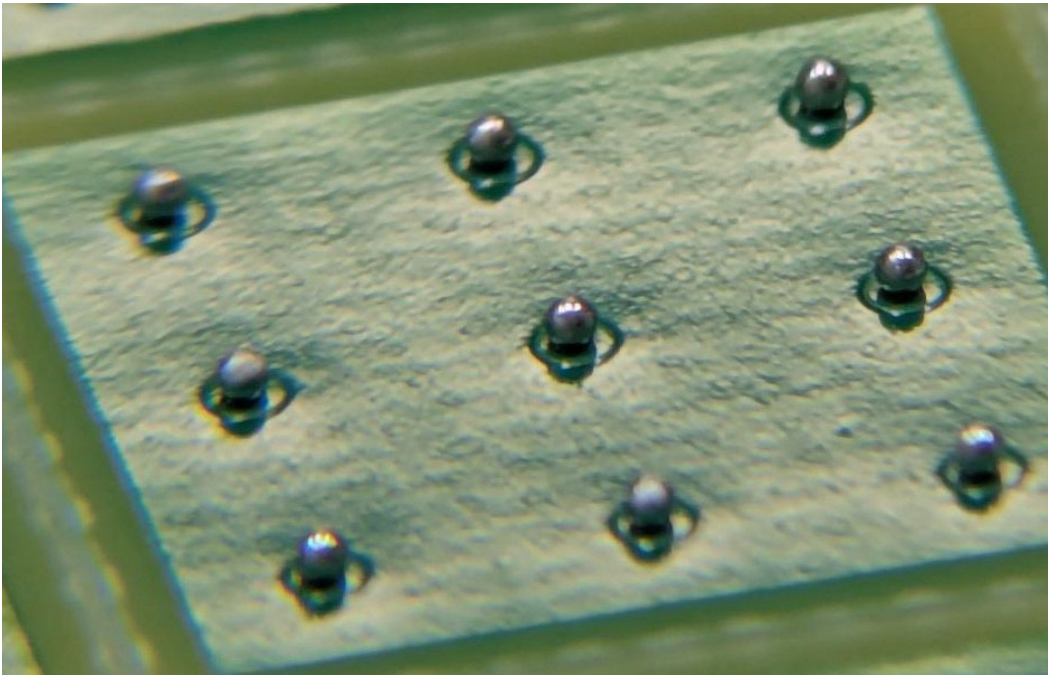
Magnified, orthogonal view of solder spheres on test sample.
